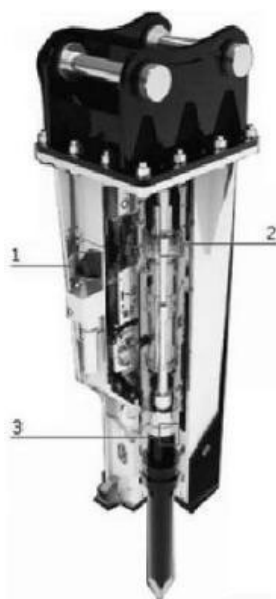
DAEMO hydraulic hammers: the attachment is equipped with a hole for supplying grease, allowing the installation of an automatic lubrication unit (models DMB 700 and above) [6]
